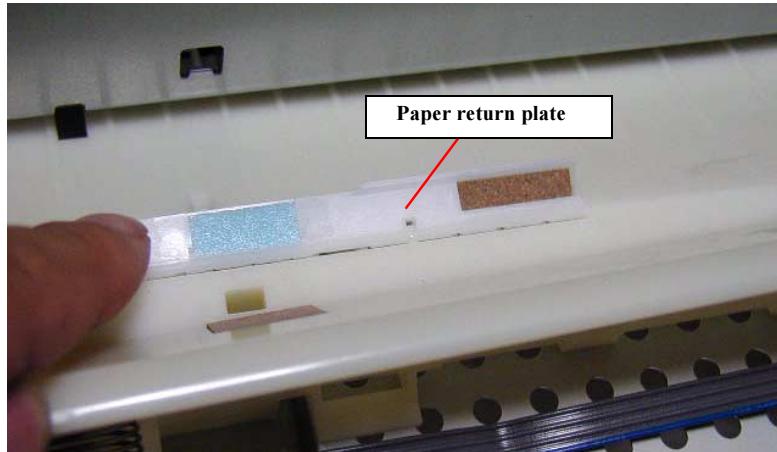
LD Roller shaft holder assembling procedure (2)
